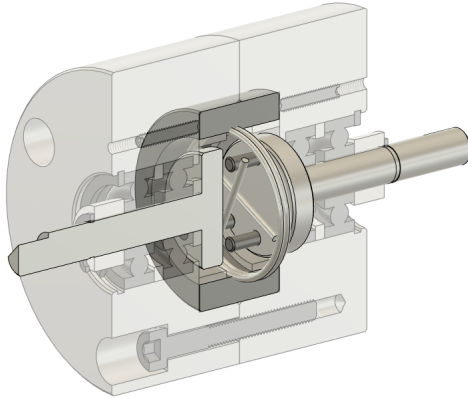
Cross-sectional view of the non-backdrivable prototype (CAD)
